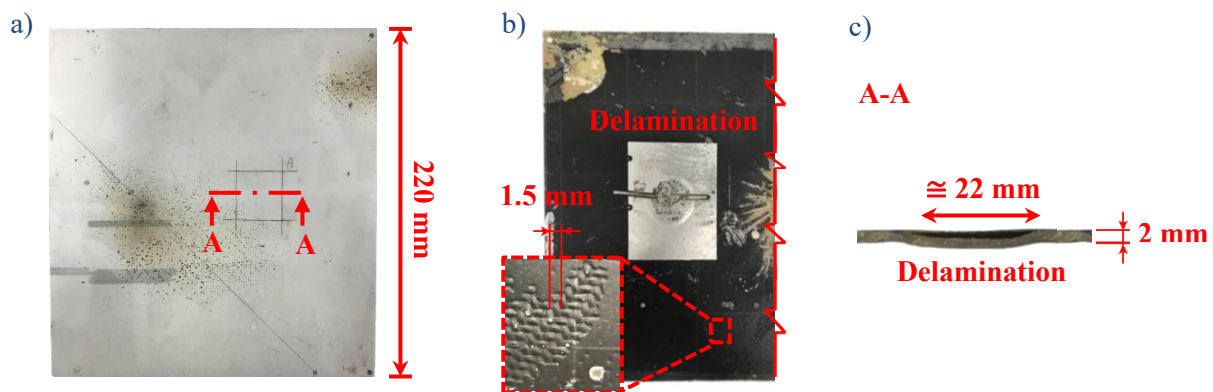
Specimen used with an enlargement highlighting the diameter of the fiberglass: a) rear view; b) front view (measurement surface); c) cross section A-A (using a similar defect for the photo)
